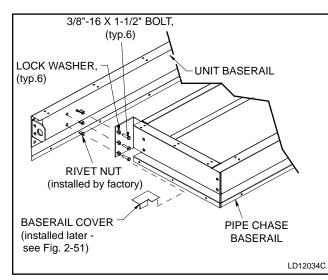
PIPE CHASE BASERAIL TO UNIT BASERAIL INSTALLATION (When Purchased)
